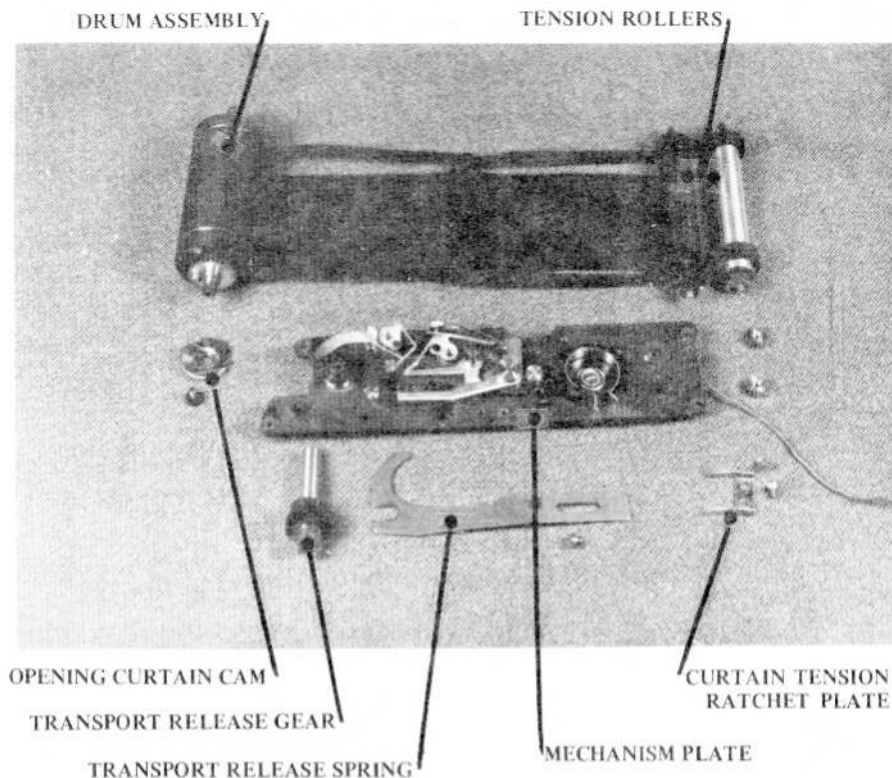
DISASSEMBLED SHUTTER ASSEMBLY
